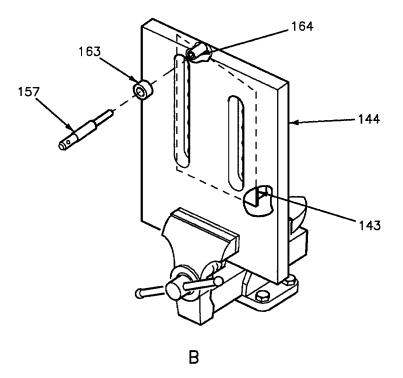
Drilling Holes in Replacement 74A110964 Support Assembly (Sheet 1)
